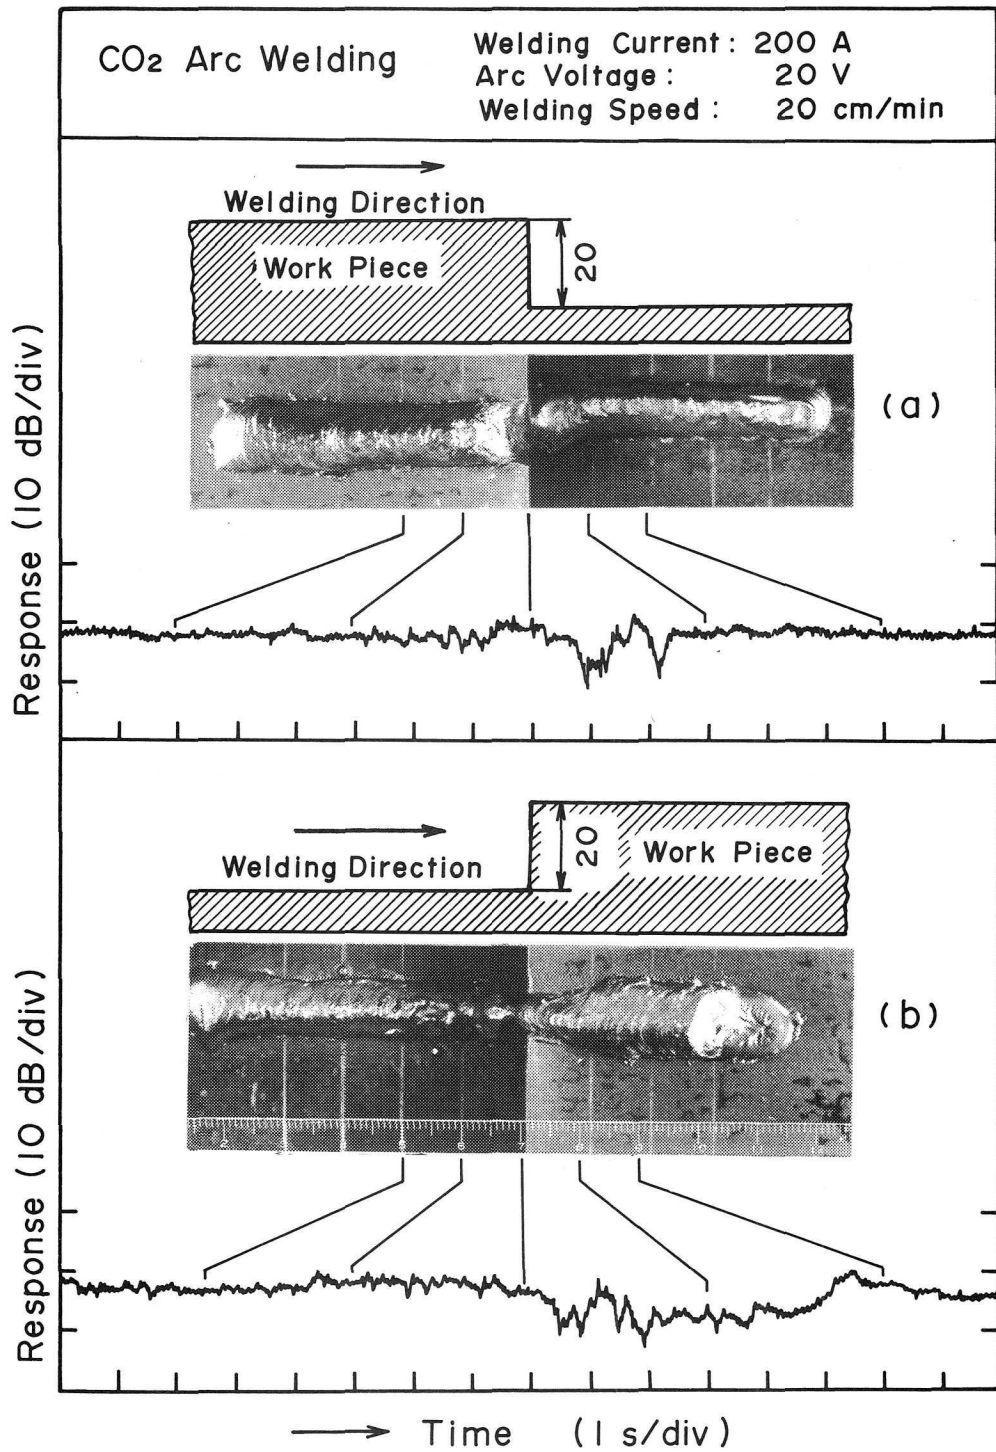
Examples of step detected by arc sound in CO₂ arc welding.
